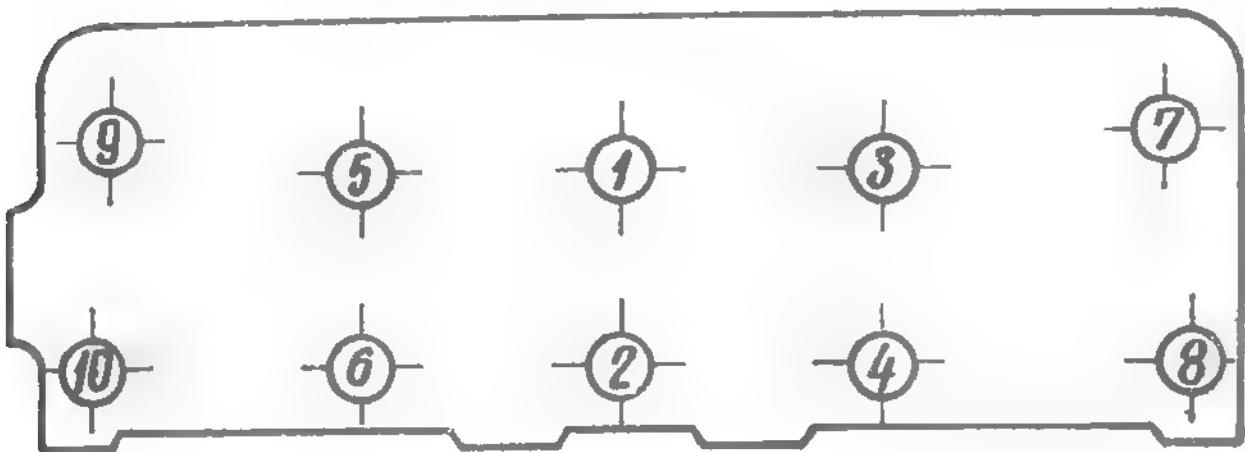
CYLINDER HEAD BOLTS FASTENING ORDER.
